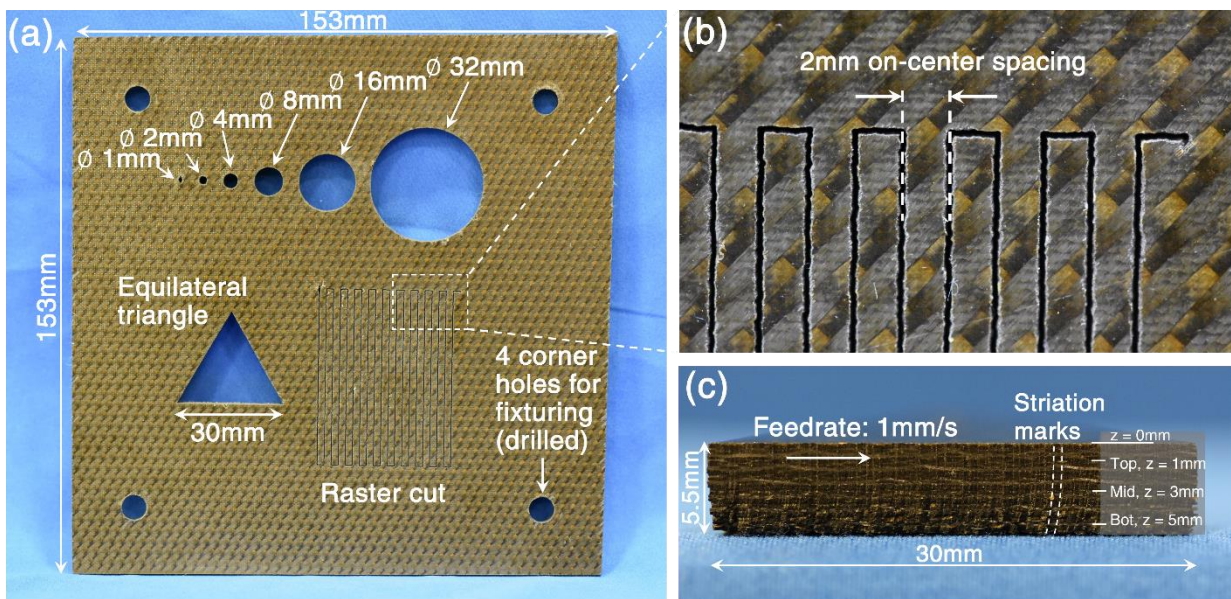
(a) Top view of various shapes cut in a CFRP sheet with WDM, (b) zoom-in view of raster kerf, and (c) side view of bottom-edge of triangle.
